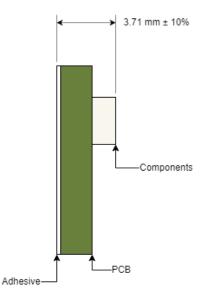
Stack-Up (A) - Thickness: PCB + 3M double-sided adhesive
